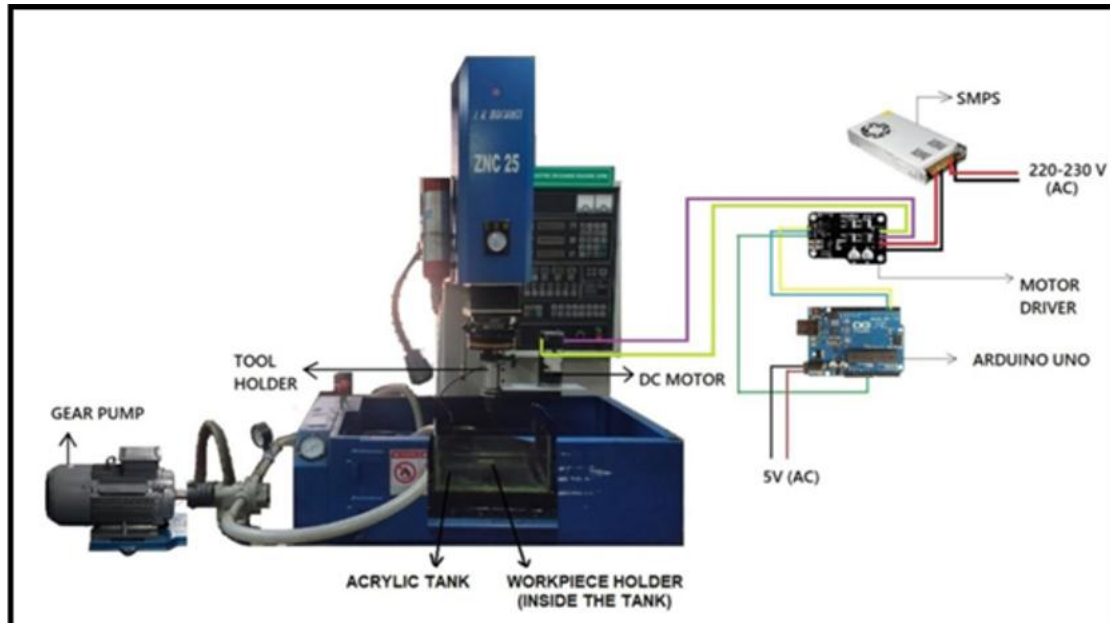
EDM setup machine model with tool rotation arrangement [40].
